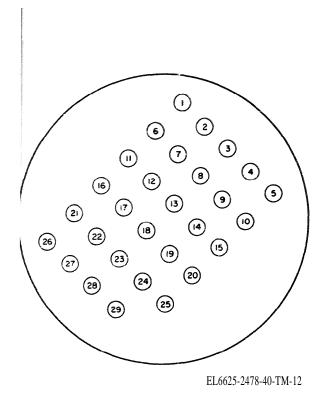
Transformer 1A3T1, terminal arrangement.
